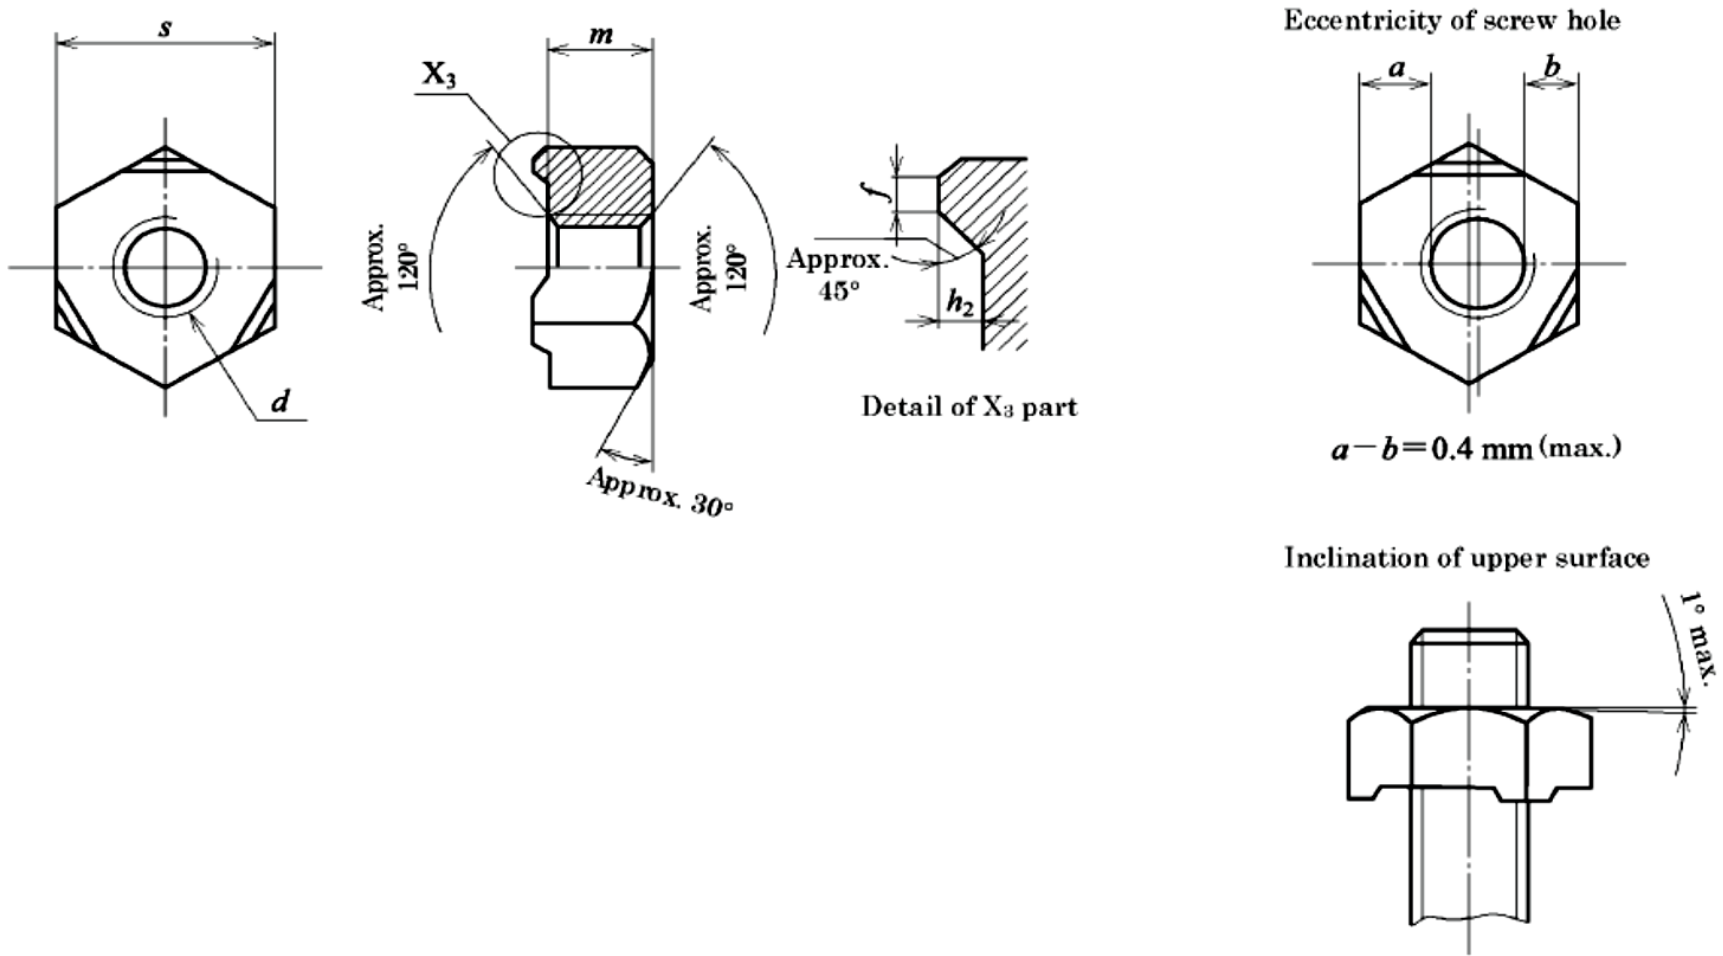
DIMENSIONS OF HEXAGONAL WELD NUTS (TYPE F)
